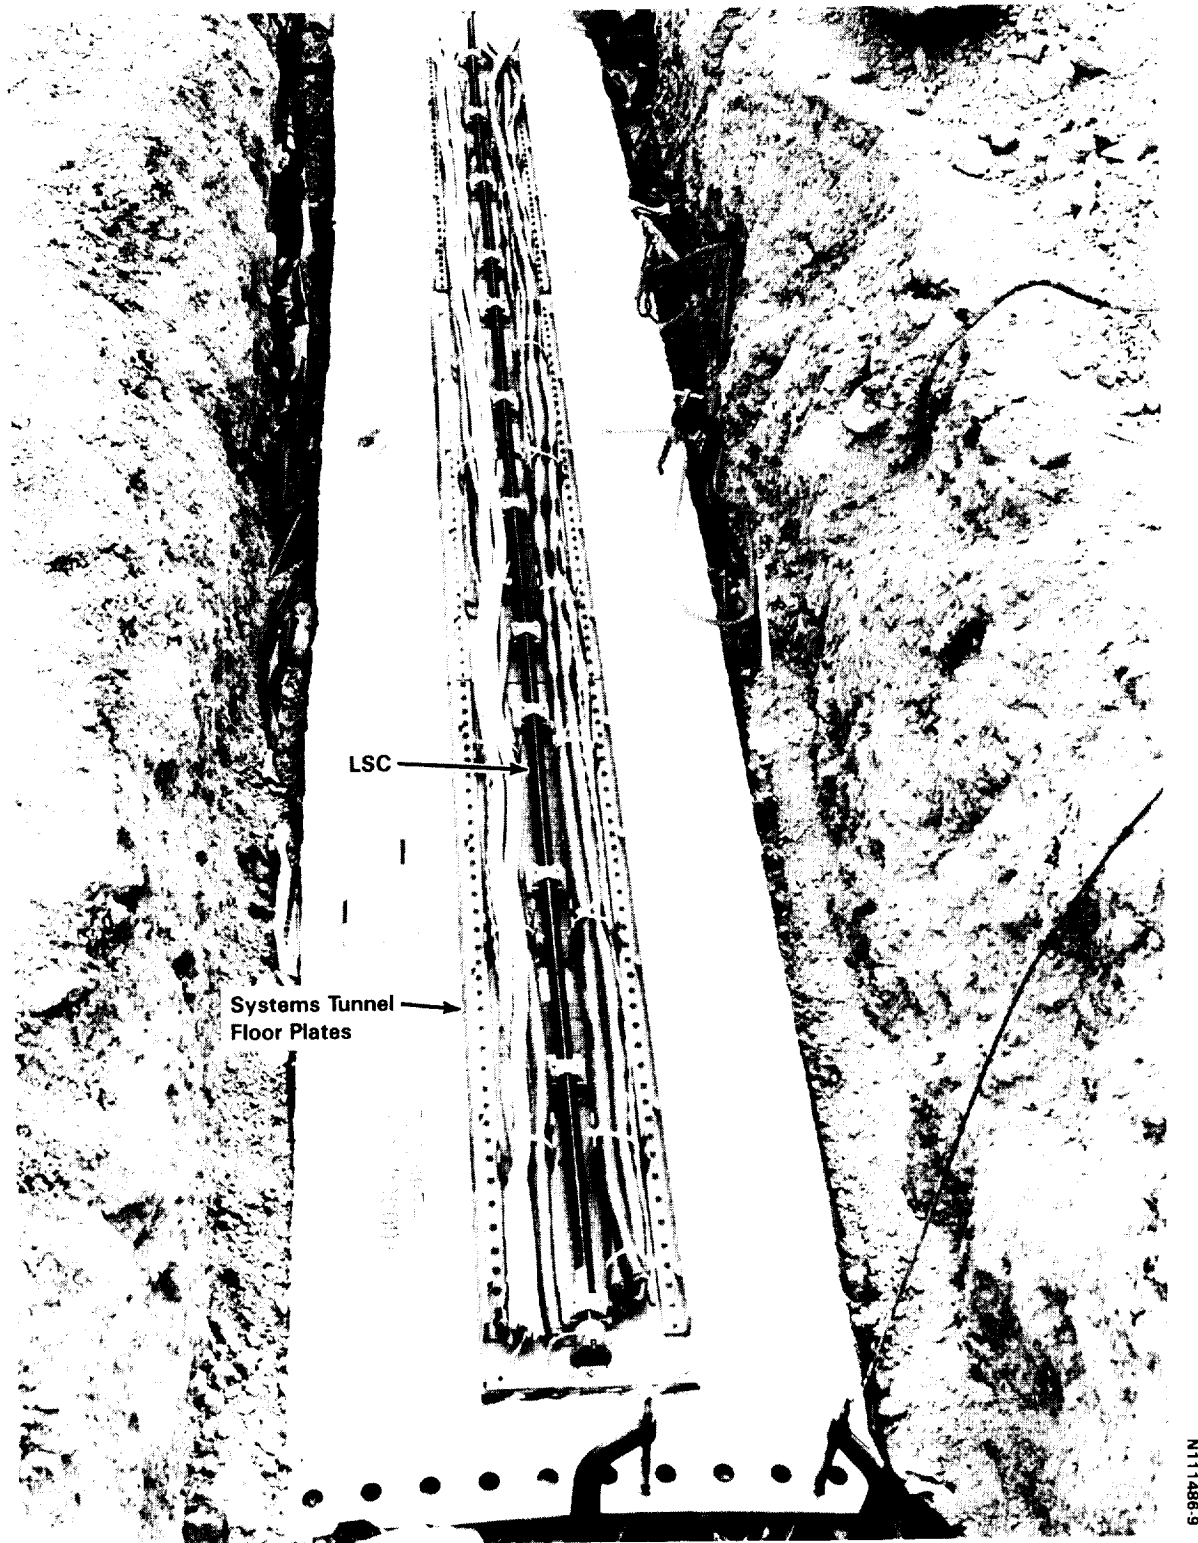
Systems Tunnel Floor Plate Assembly—Grounding Straps
